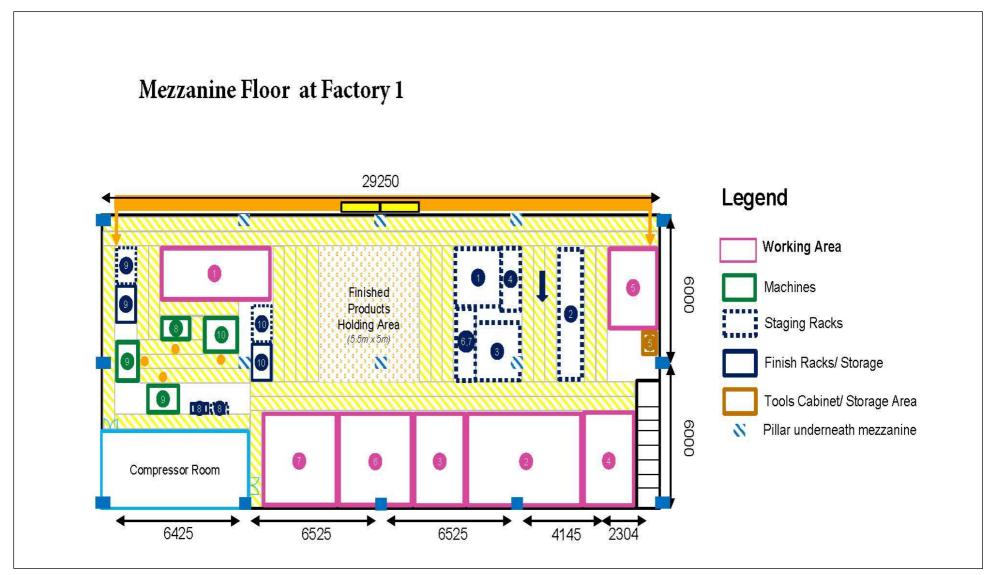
Machine Layout Plan of Mezzanine Floor at Factory 1
